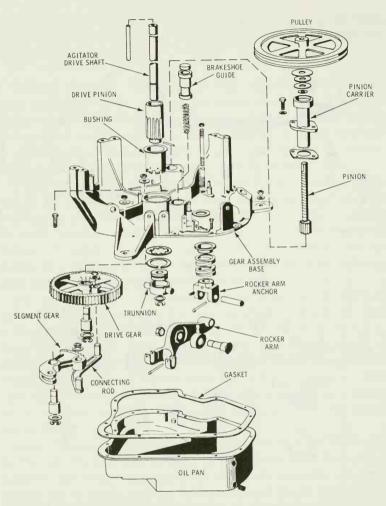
The gear-case assembly of a typical agitator-type washing machine.
